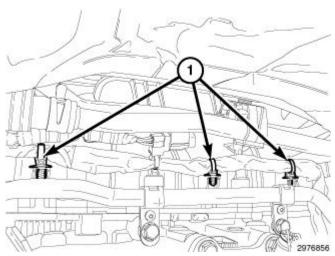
Turbocharger Outlet, Exhaust Down Pipe & Clamps Courtesy of CHRYSLER GROUP, LLC
